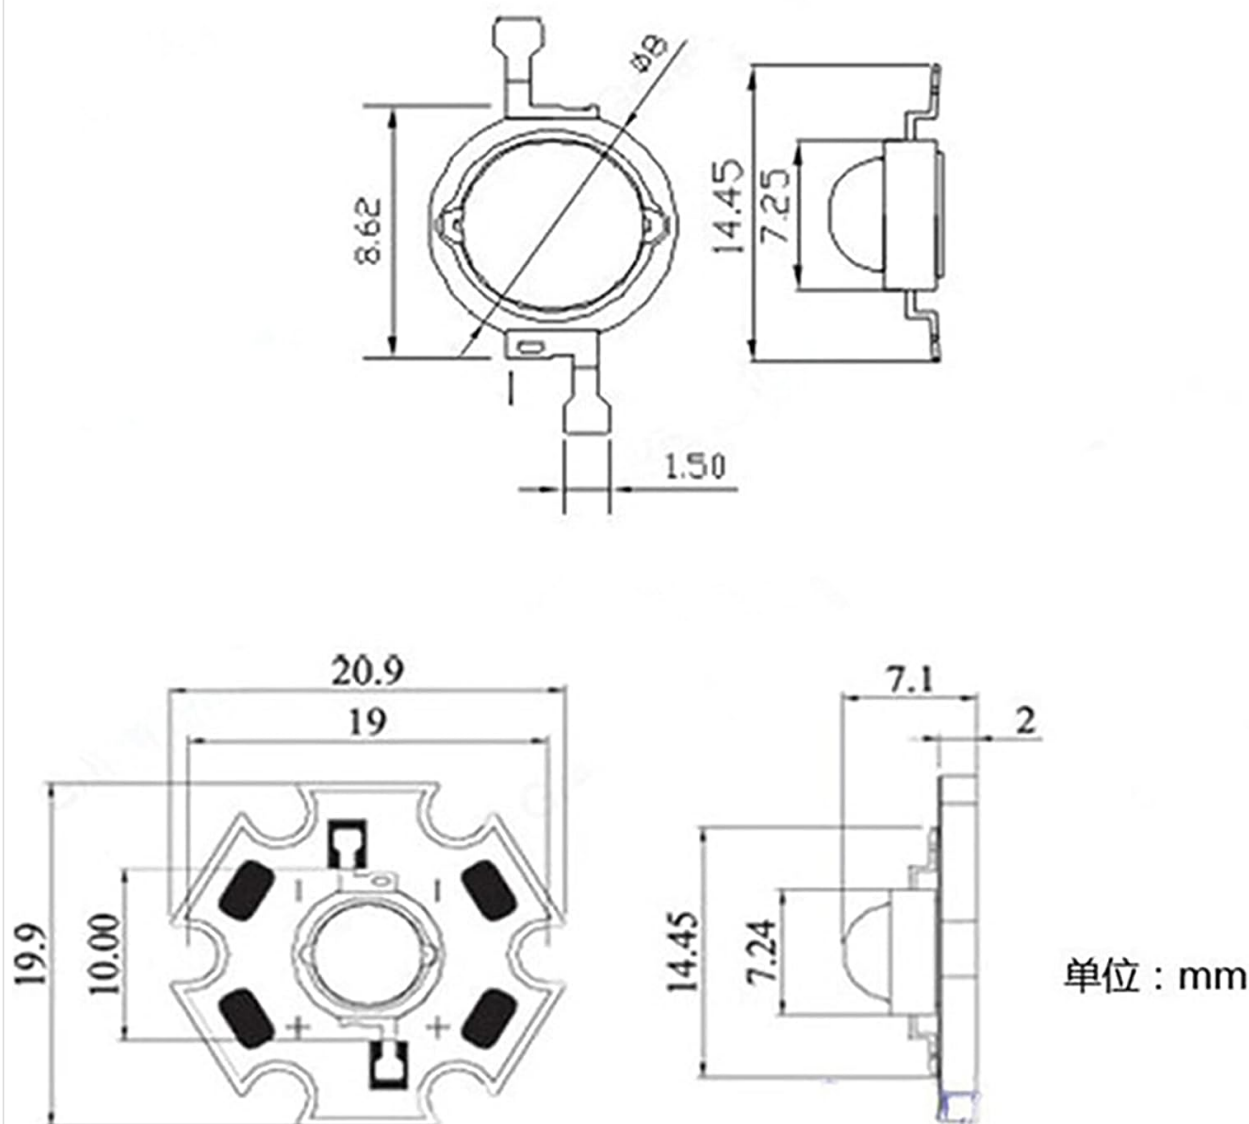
Technical drawing showing the dimensions of the 3W UV LED Chip.
